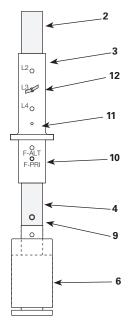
Larger view of trip rod assembly. See Table 10 for parts identification
